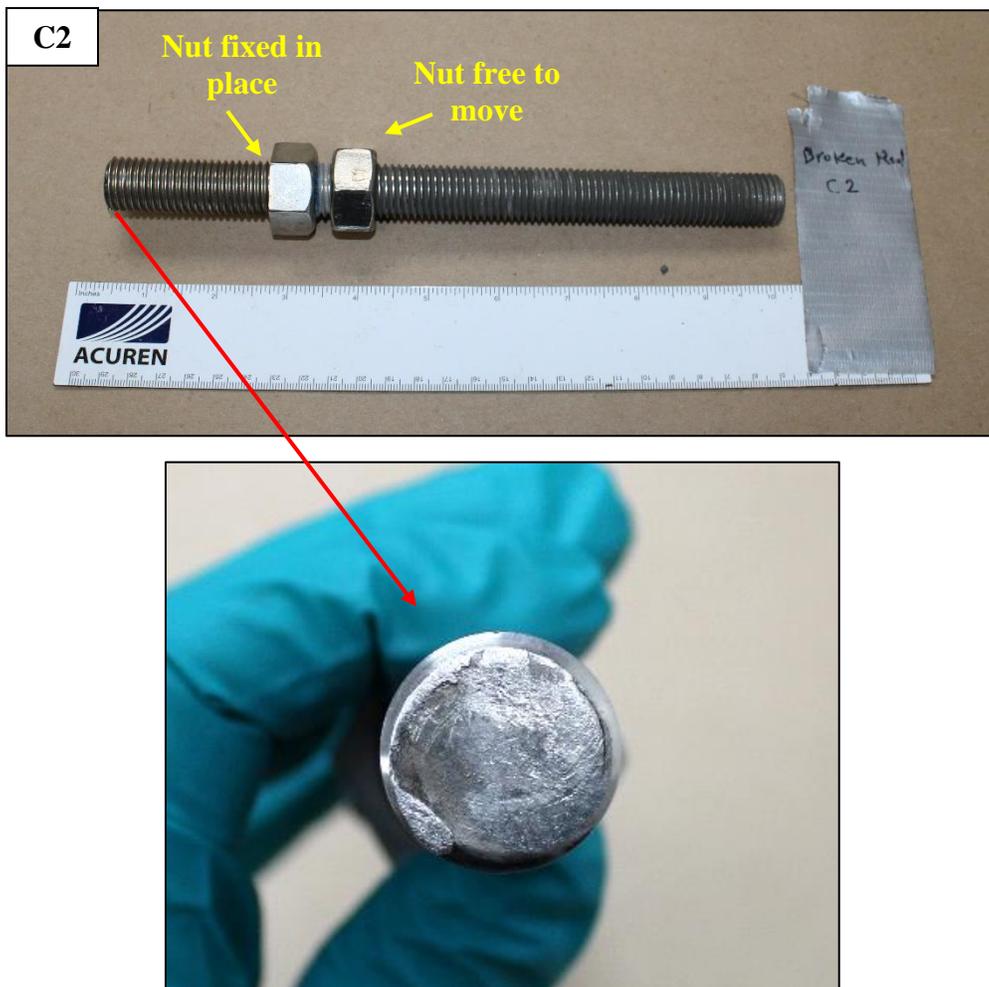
PHOTOS OF BOLT C2 AND THE FRACTURE SURFACE AT ONE END.
